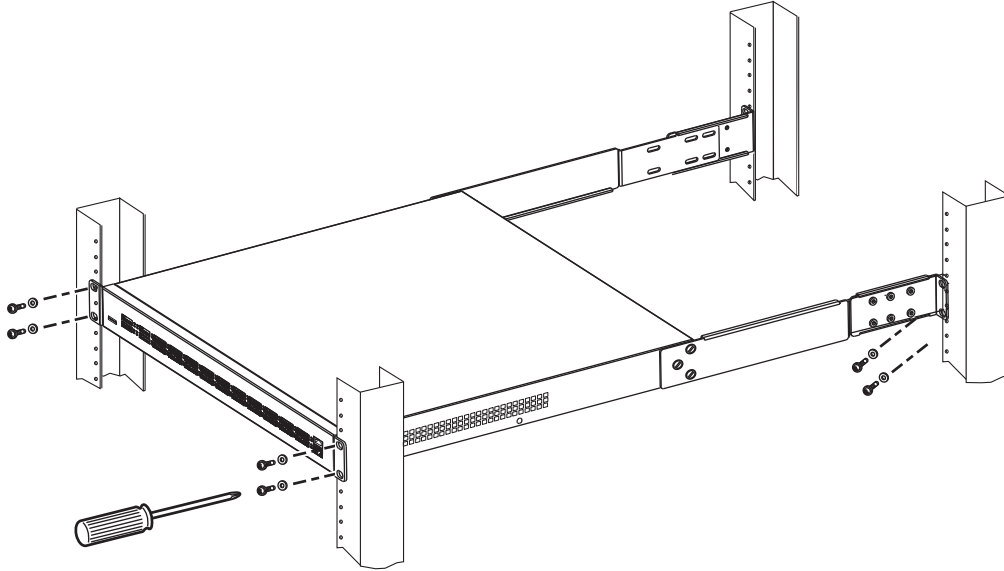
Four-post Rack-mounting with Adjustable Rear-mounting Brackets, Step 1
